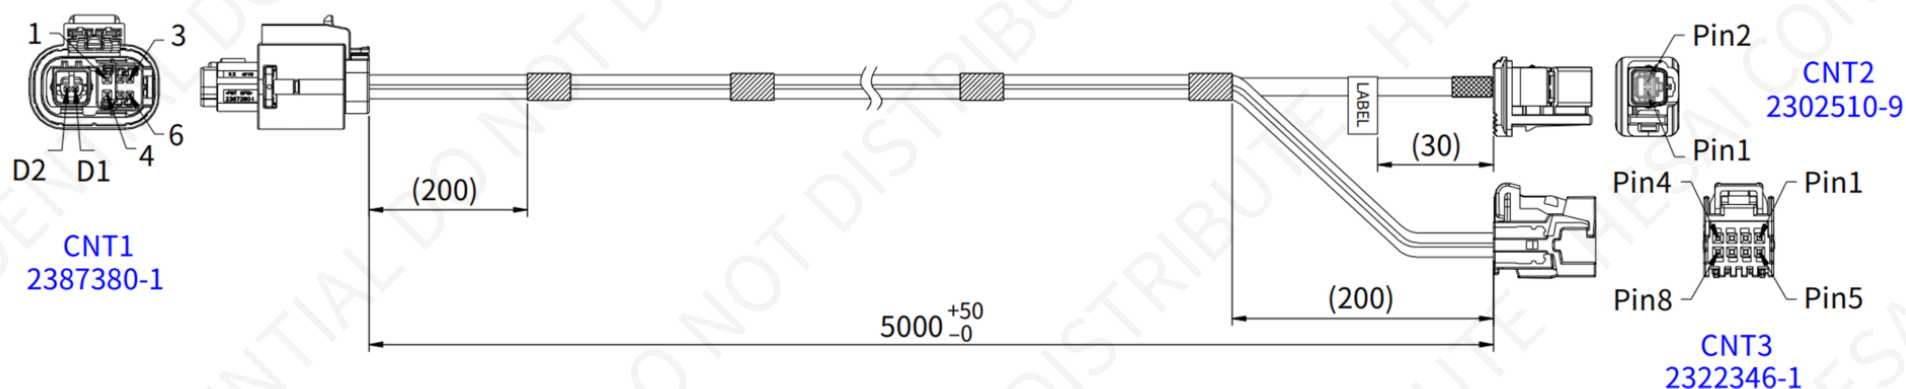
Cable assembly between lidar and connection box (unit: mm)
